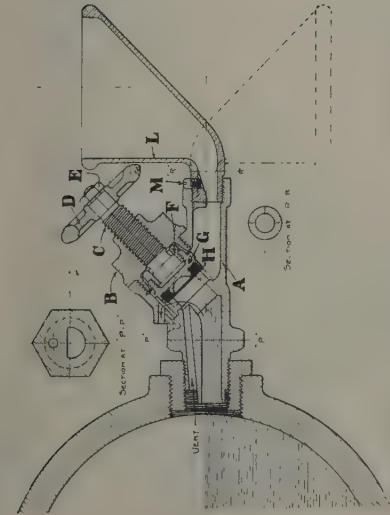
Combination Valve for Expansion Drum of Hot Water Circulating System.
